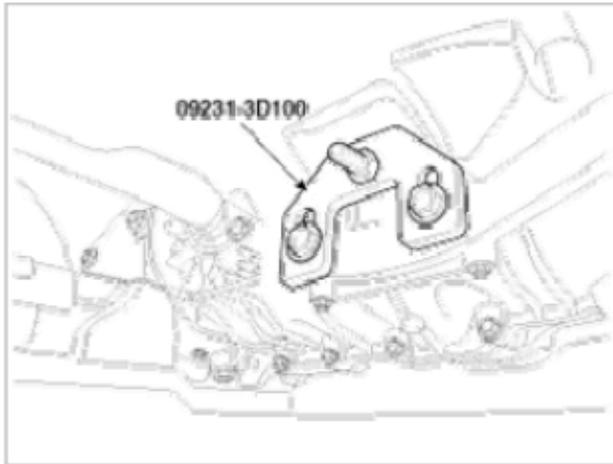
Identifying SST (09231-3D100) And Mounting Bolts
